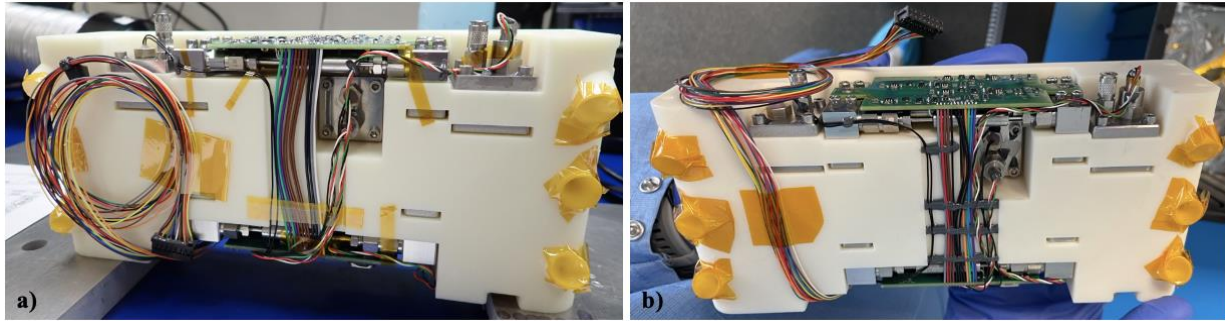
Integrated SPS a) pre- and b) post-staking.
